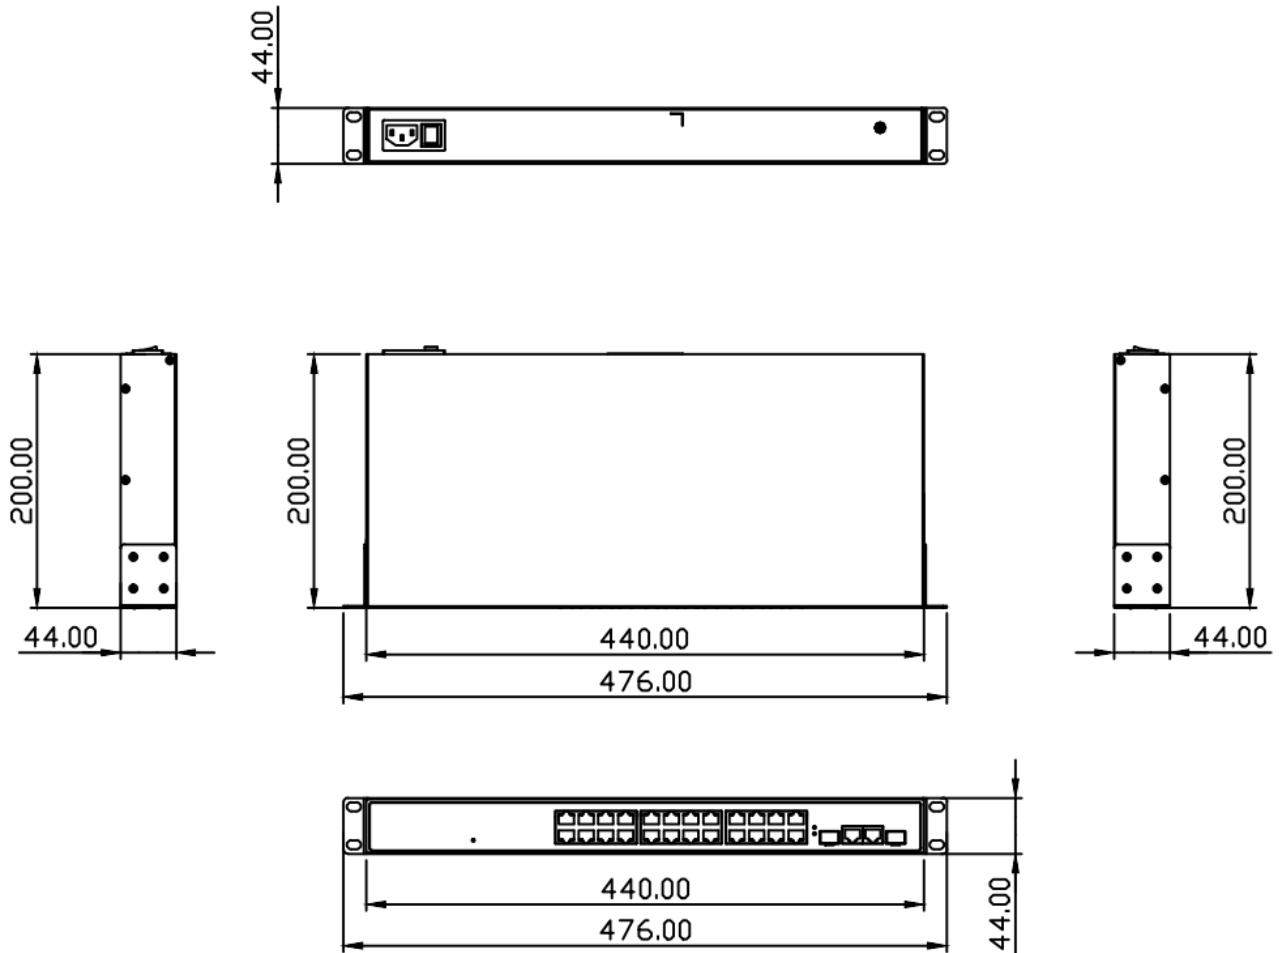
REG2-2602-2C Series Physical Dimensions
